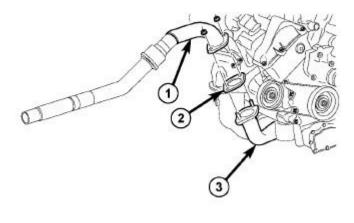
Exhaust Extension Pipe & Gasket Courtesy of CHRYSLER LLC
